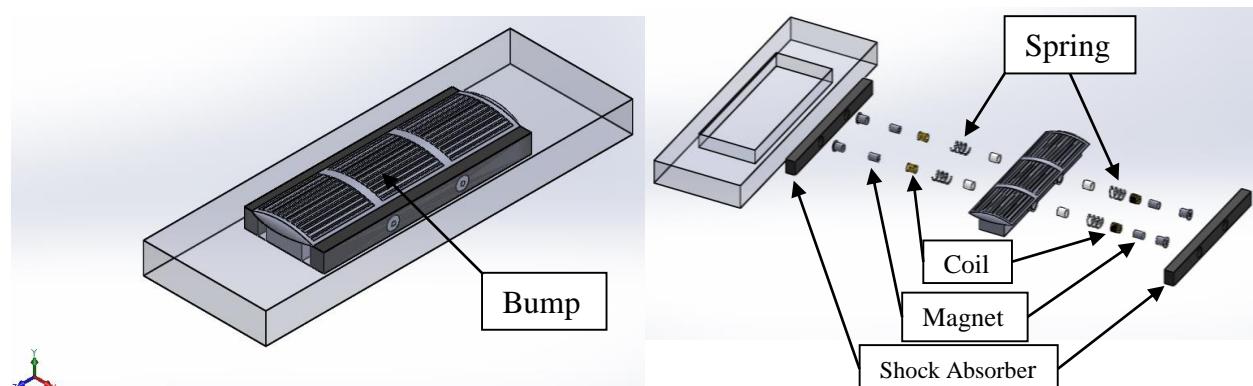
Prototype 2_Configuration (Left) & Exploded View (Right)
